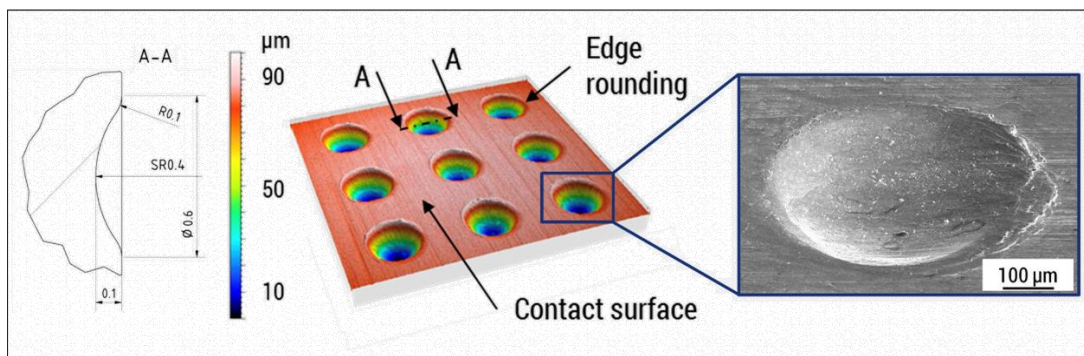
Various views of the calottes with run-in radius: technical sectional drawing (left), 3D microscopy of the 90° grid on the active part surface (middle) and SEM image (right) of a single calotte
